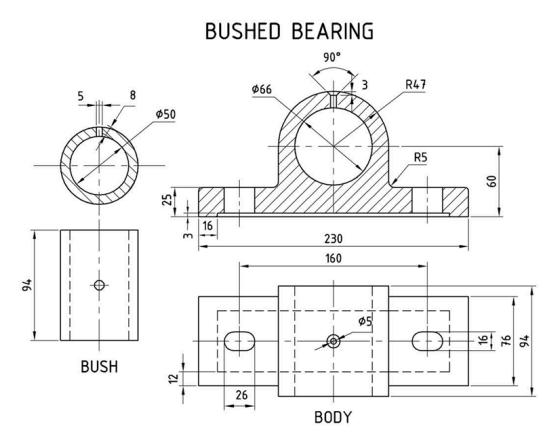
Bushed bearing assembly (all dimensions are in mm)
